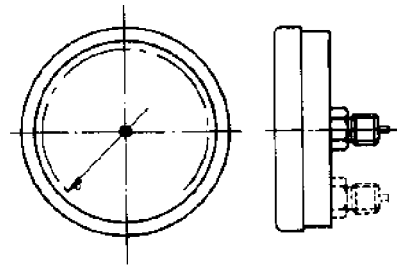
DIRECT MOUNTING GAUGE WITH BACK CONNECTION
